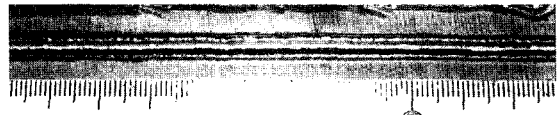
High speed welding bead shape on steel by CMT process at welding speed of 3m/min using the 100% CO₂
